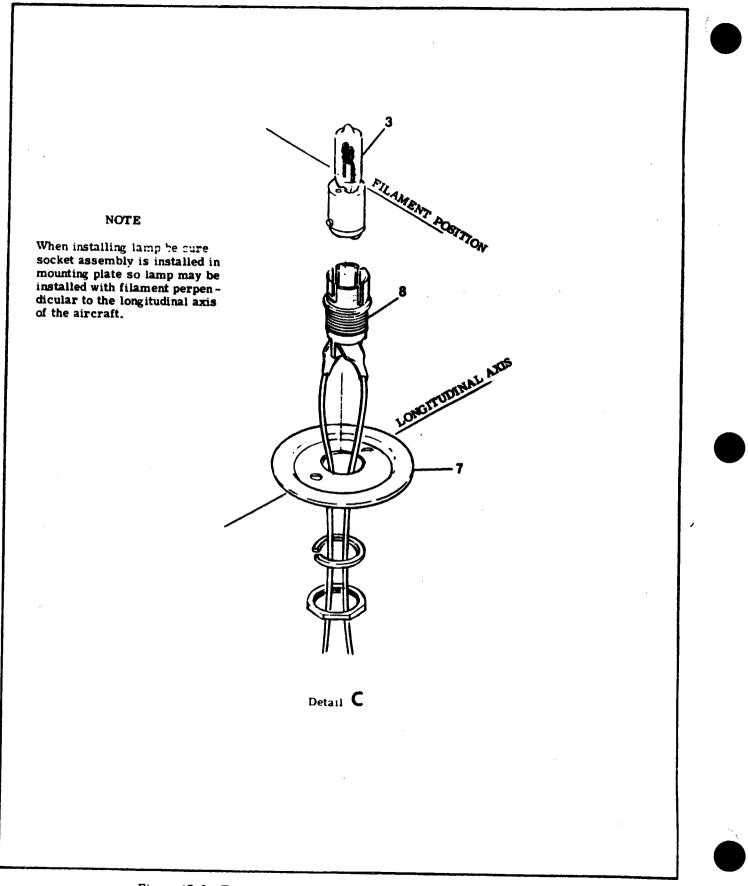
Flashing Beacon Light Installation (Sheet 2 of 2)
